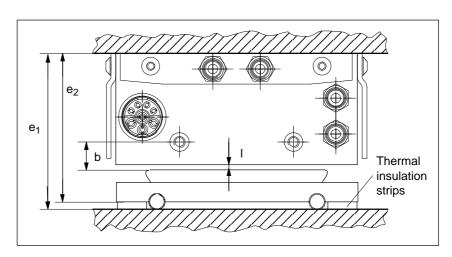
Important dimensions when mounting 1FN1 motors
